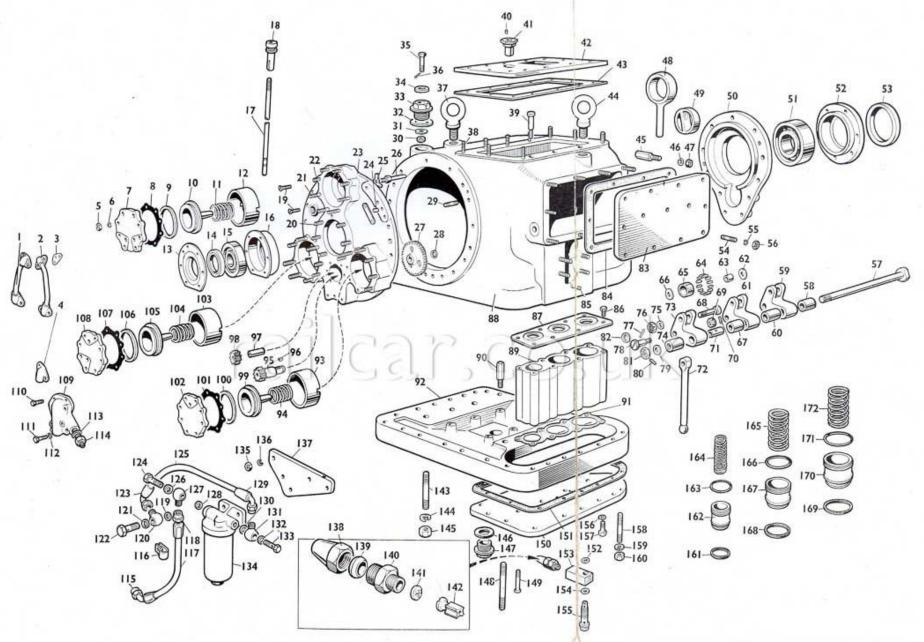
EXPLODED VIEW OF CASINGS AND COVERS
